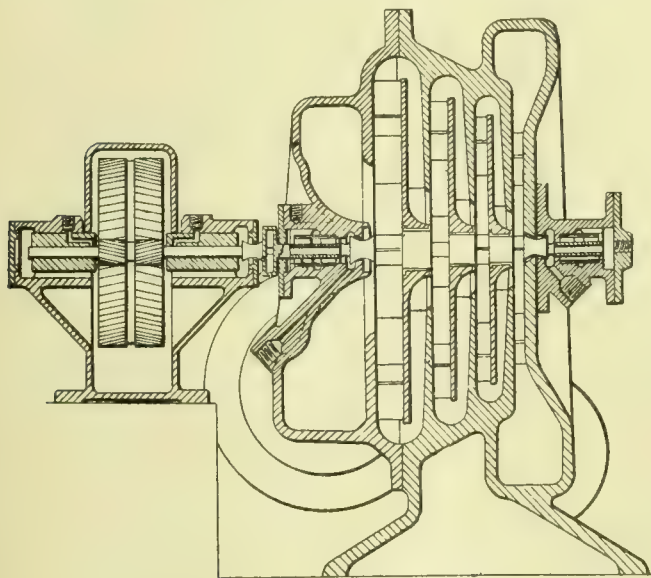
WESTINGHOUSE-LEBLANC AIR COMPRESSOR.
